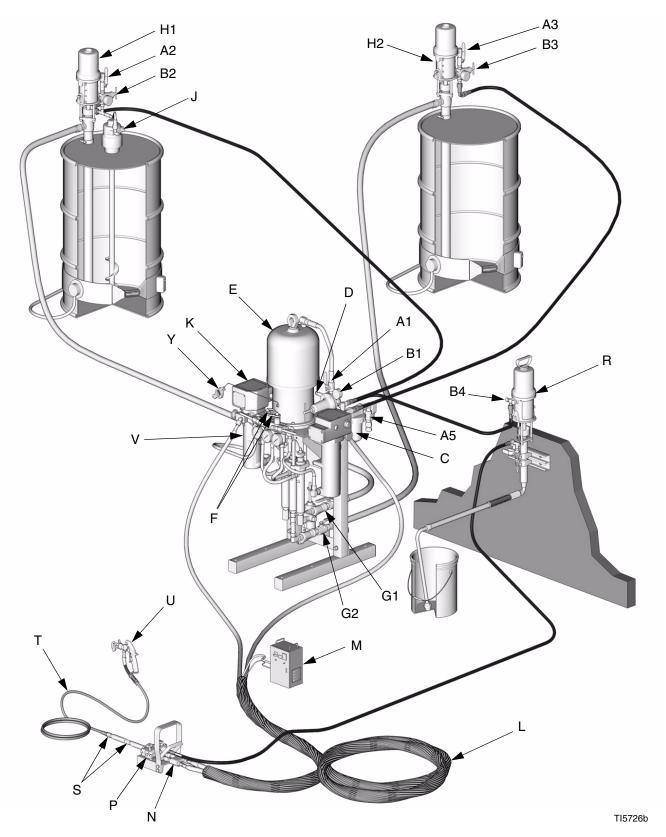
Typical Installation (Hydra-Cat System Shown)
